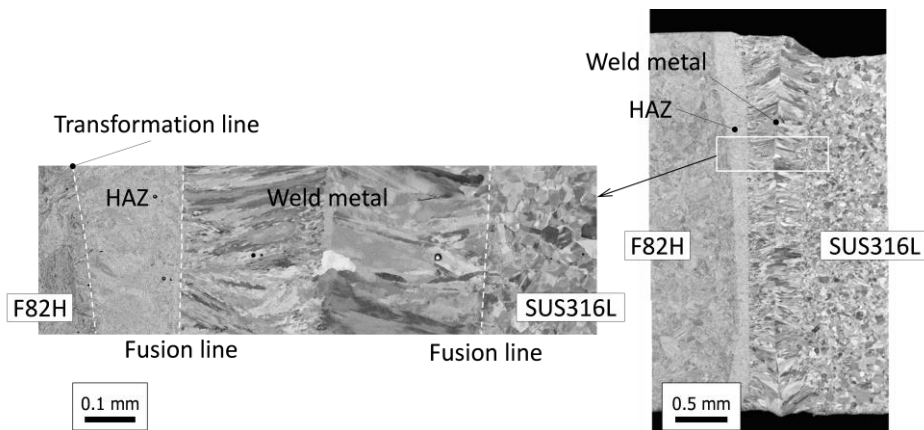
Cross-sectional microstructure of F82H/SUS316L welded by 4kW fiber-laser welding. Beam position were shifted from the abutting surface (broken line in the figures) to SUS316L side.
